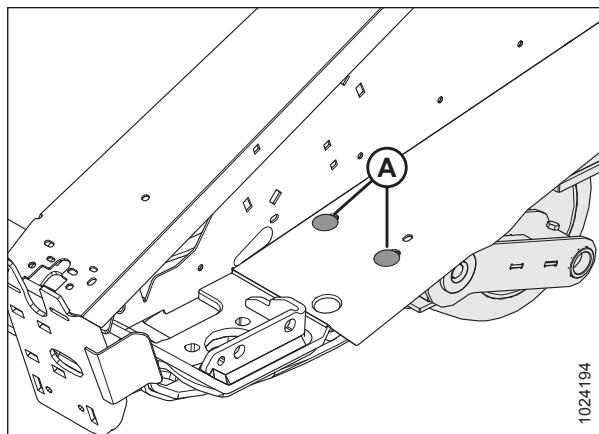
Jack and Outboard Wheel Assembly – View from Rear
